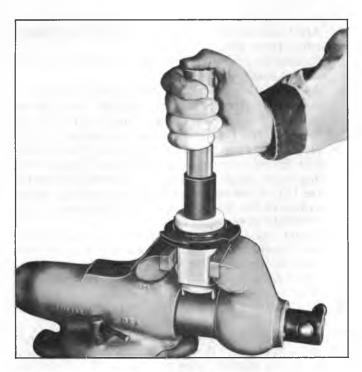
H--Seating Floating Control Valve Assembly with Installer J-23175
